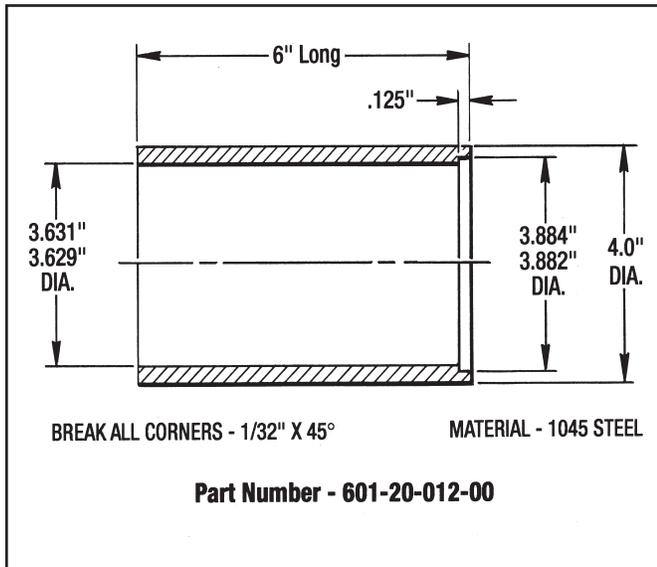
Wear Sleeve (#874) Assembly Tool
